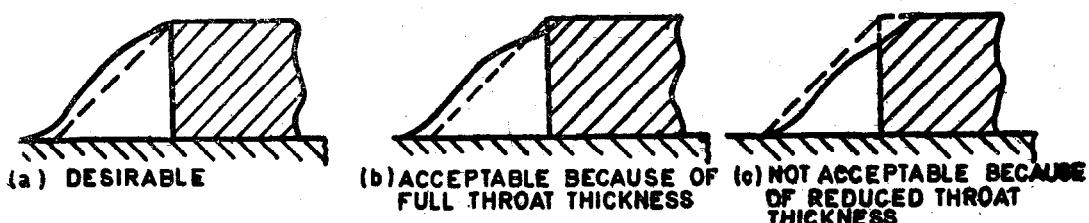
FILLET WELDS APPLIED TO THE EDGE OF A PART
